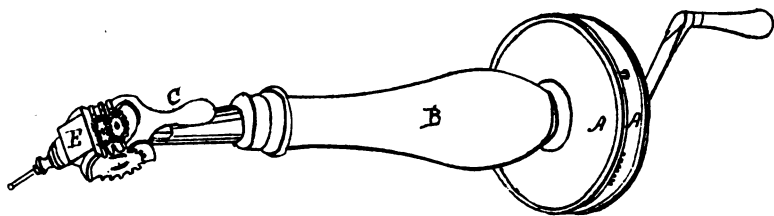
Drawing of hand drill with adjustable head patented by John Lewis, November 29, 1838.
